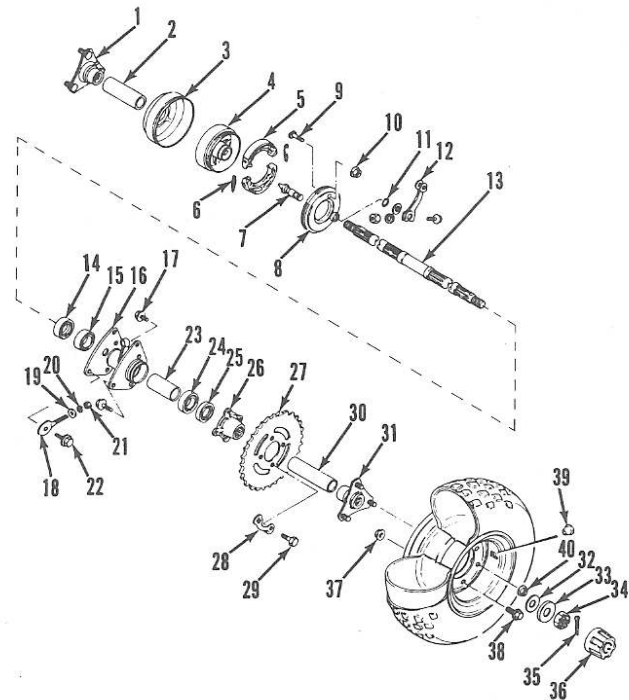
Exploded view of rear axle, brake and related components used on both models.
